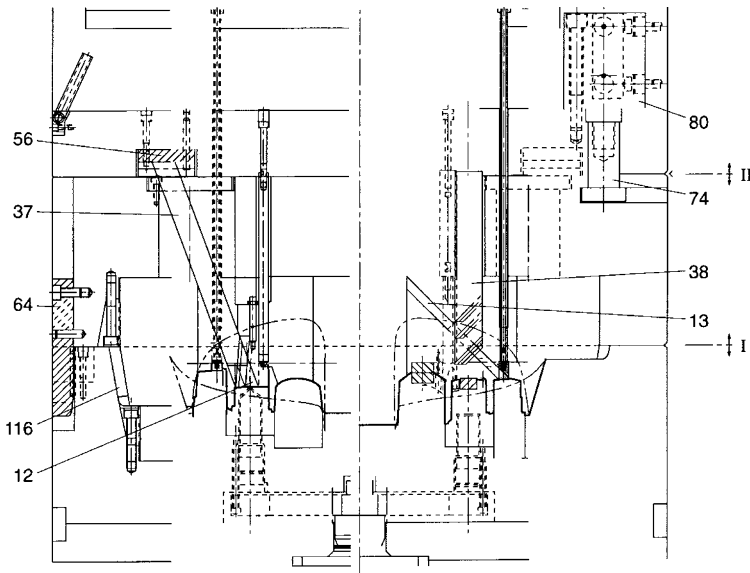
Injection mold; 12: submarine split; 13: displacing split; 32: lifters; 38: control bar; 64: guide bar; 74: coupling bolt; 80: hydraulic block cylinder; 116: tapered surface
